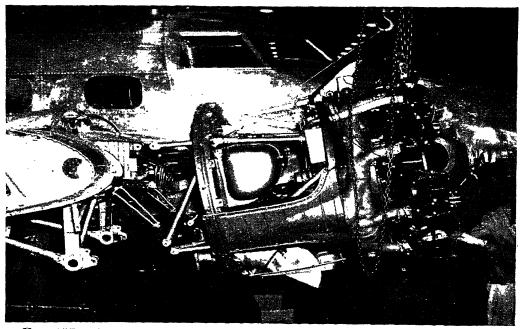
Attaching the engine and mount to the nacelle of a 14-passenger Lockheed air liner. Engine-control rods, oil tank, corrosion-resistant exhaust collector ring, and many other parts are visible.
